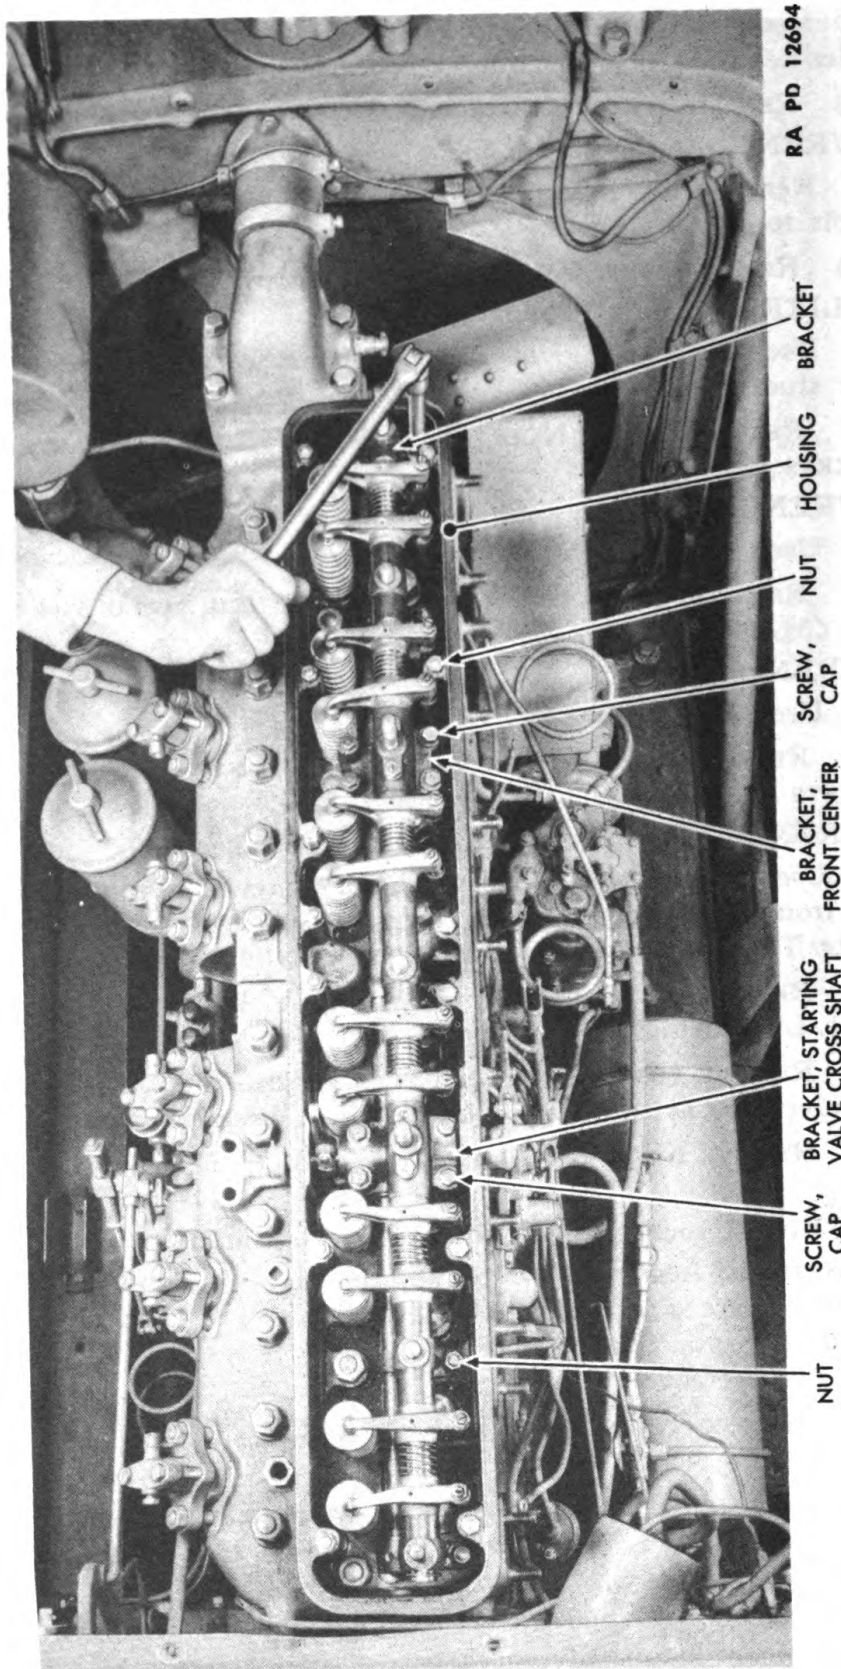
Removal of Valve Lever Shaft Bracket Nuts from Valve Shaft Bracket
